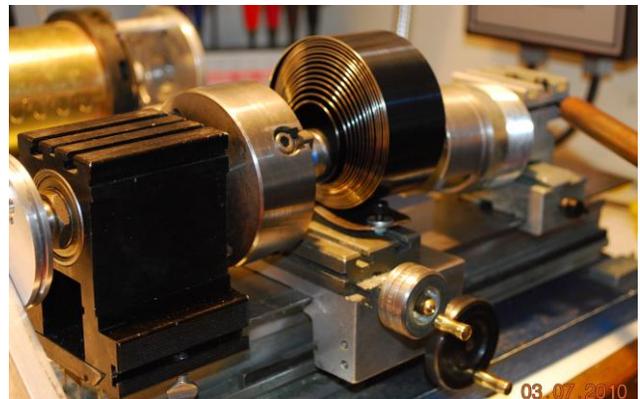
Taig lathe used as a mainspring winder. Part of the handle is just visible in the lower left corner. A retaining sleeve is installed over the tailstock end ready to slip over the spring when it is fully wound. A machine screw, washer and two nuts fasten the free end of the mainspring to the cross slide.
